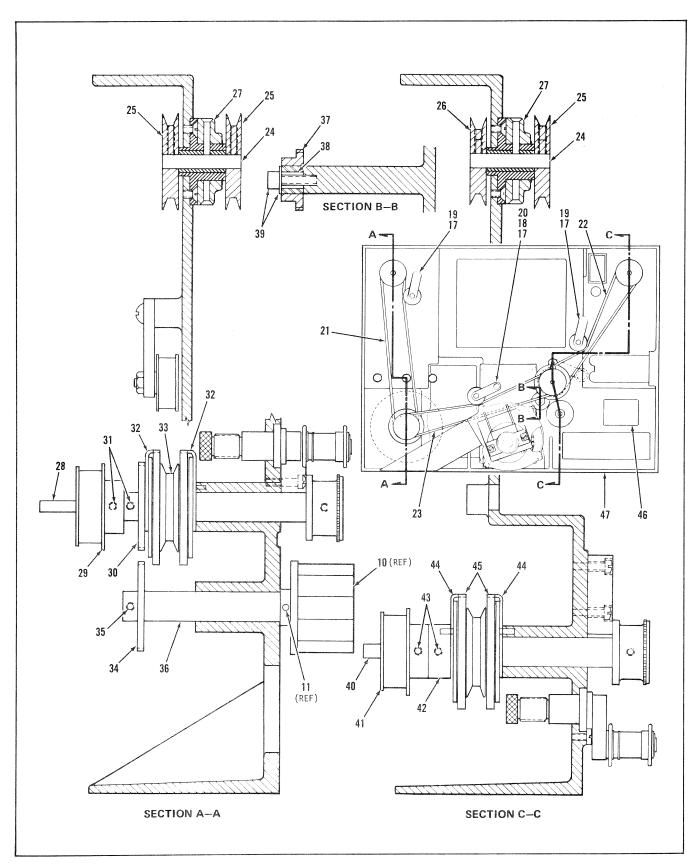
Drive Assembly (Sheet 2 of 2)
